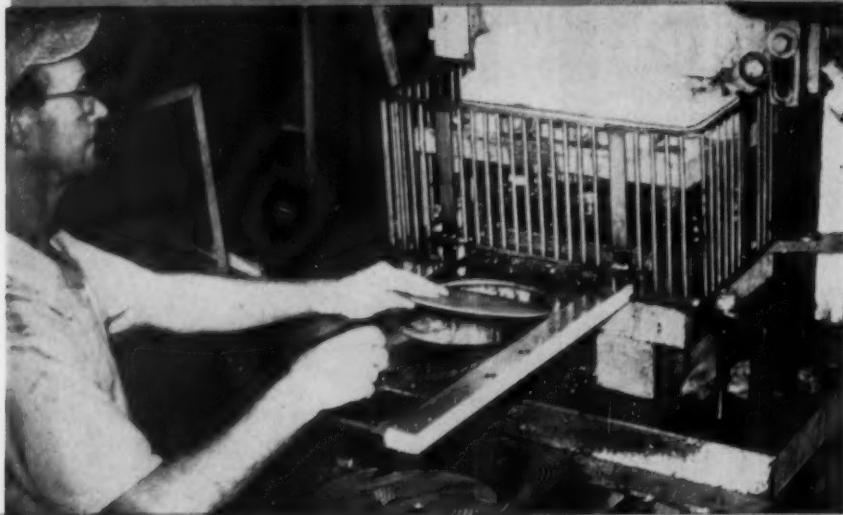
Here is shown a method of loading the shuttle feed while it is in the "out" position. The guard extends above the ram of the press, thereby eliminating any shear points.
